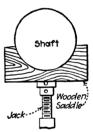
Wooden saddle for holding shaft when it is being raised with a jack.
